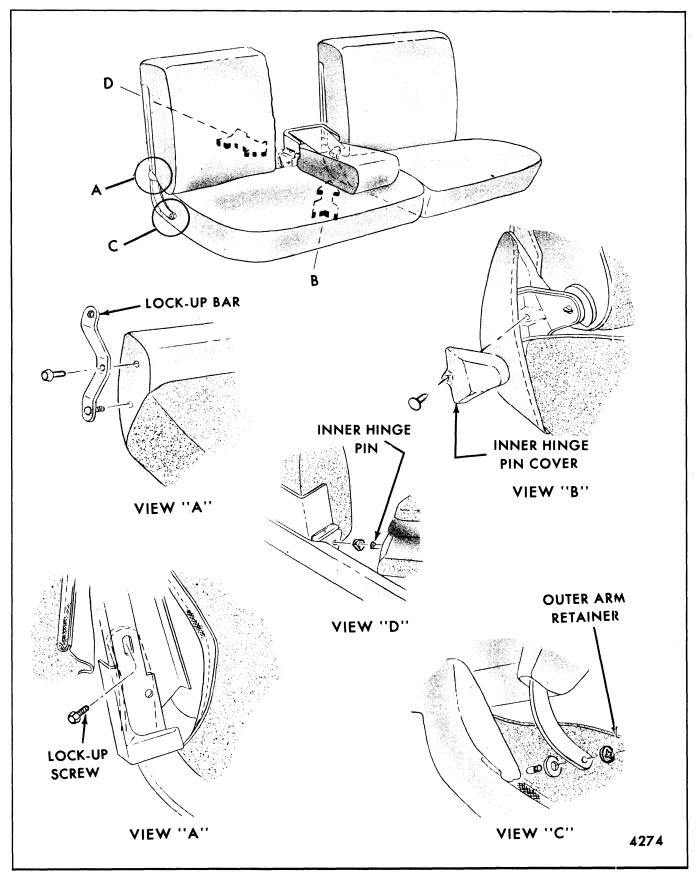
Front Seat Back Attachment (Right or Left) - Four-Door Style 60-40 Seat
